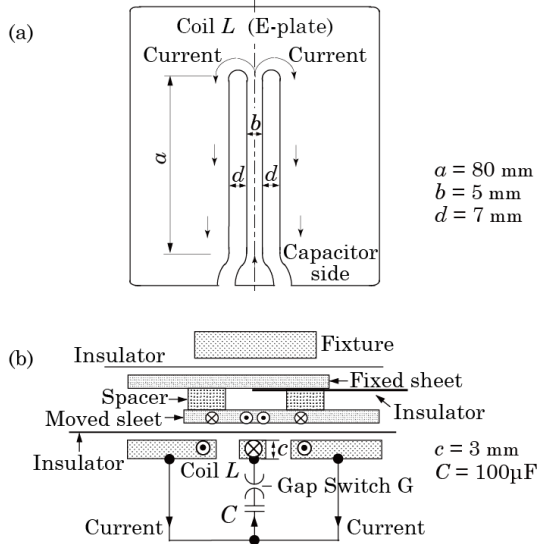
General outlines of apparatus: (a) plan view of one-turn coil without sheet metal and fixture, (b) section view with discharge circuit.
